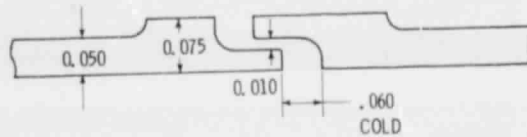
Electro-chemical machining of P&WA E<sup>3</sup> combustor liner cooling holes.
